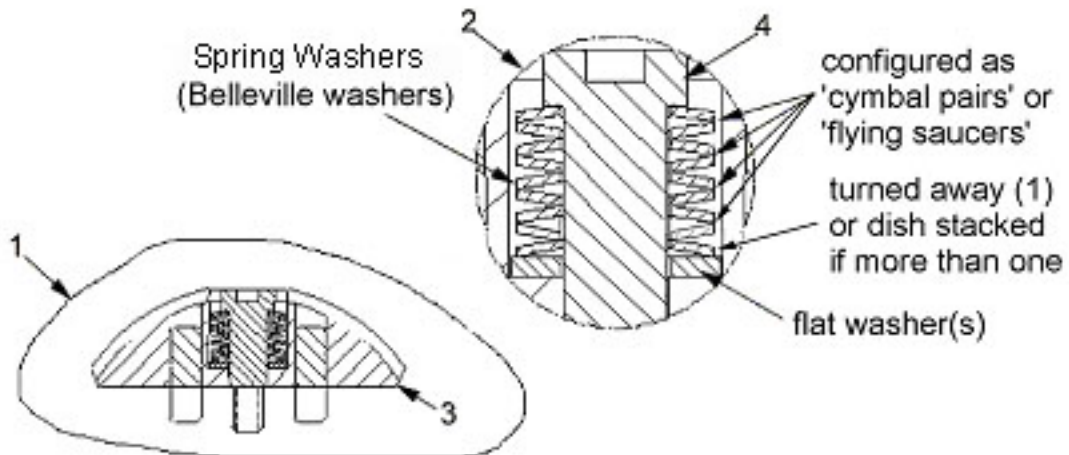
Some configuration of clutch spring stack. Each 'spring' stack contains multiple springs (Belleville washers) - arranged into three, four, or five 'flying saucers', or turned away against the flat washer(s). Shown is the 4 ½ stack.
